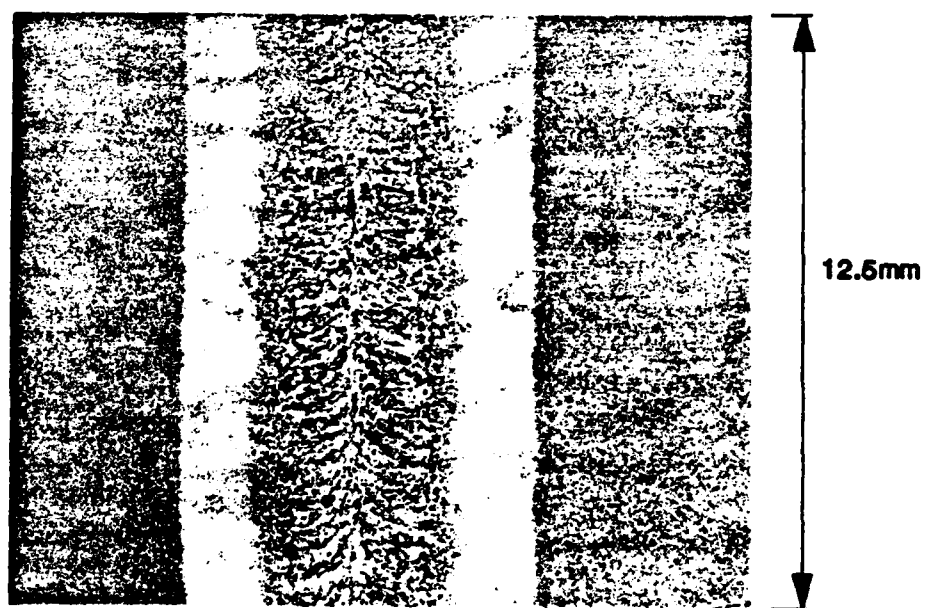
LONGITUDINAL MACROSECTION OF EB WELD
